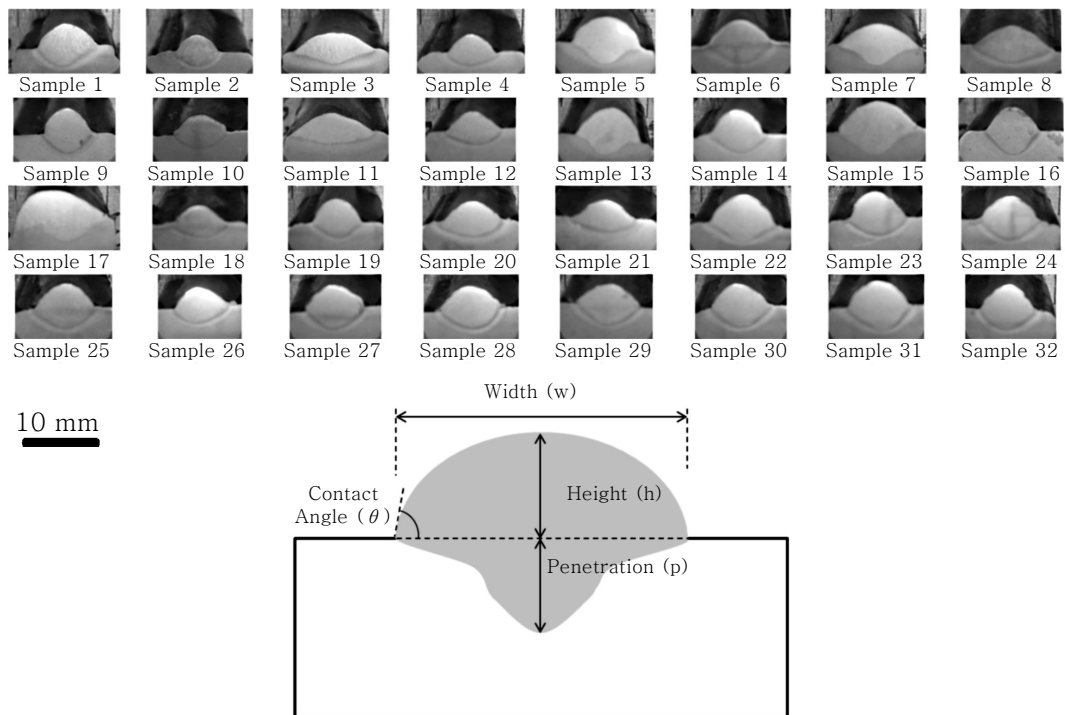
Photographs of the bead profile in cross section for the 32 samples and schematic representation of the weld bead geometry
